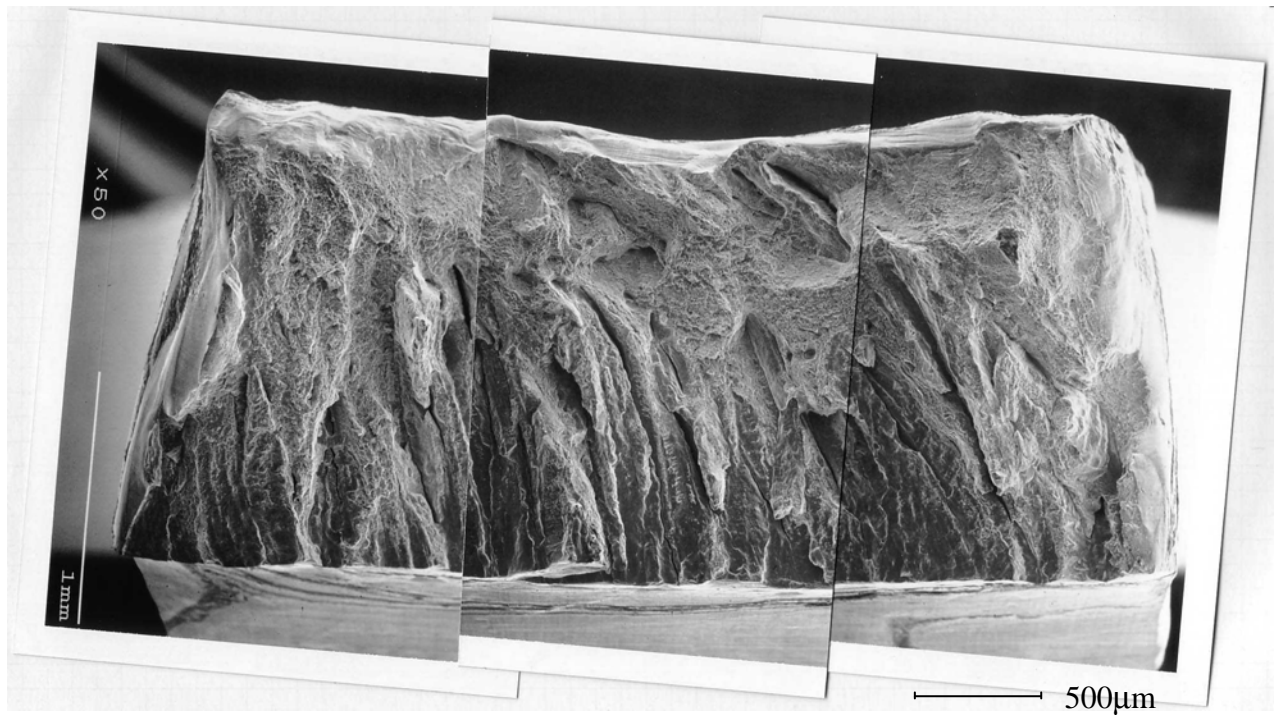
SEM microphotograph of the fractured surface of Alloy 132 weld metal of the SSRT test specimen (Temp.: 360 °C)
